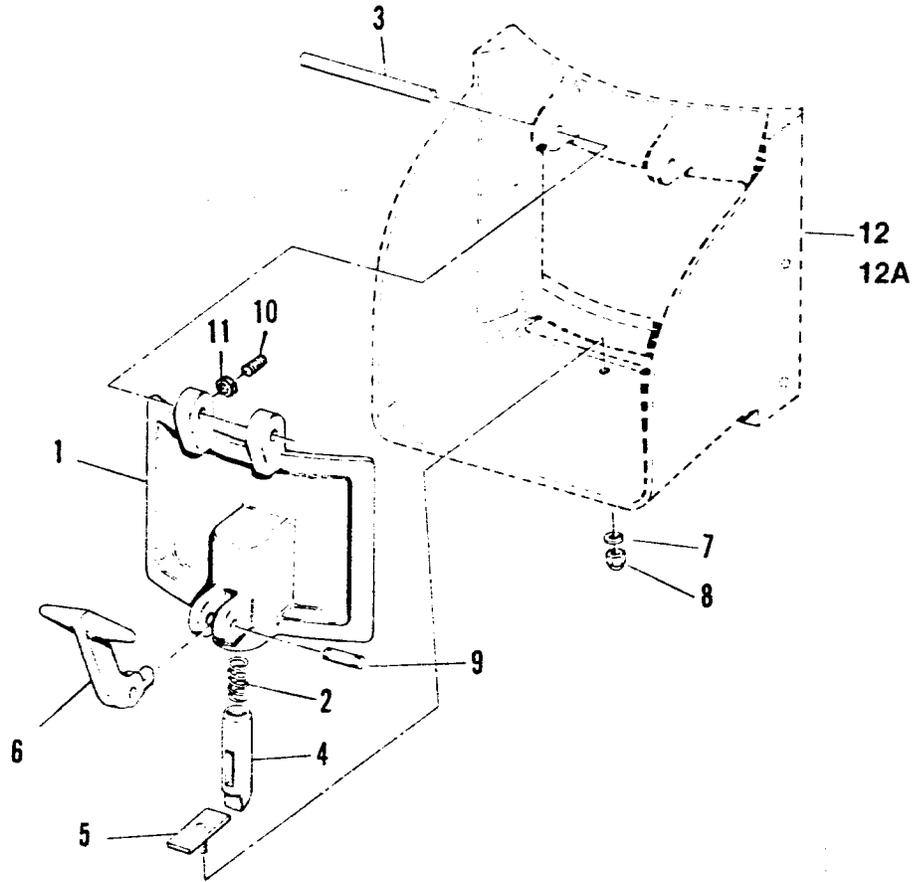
DOOR ASSEMBLY (Not Available As Assembly)
